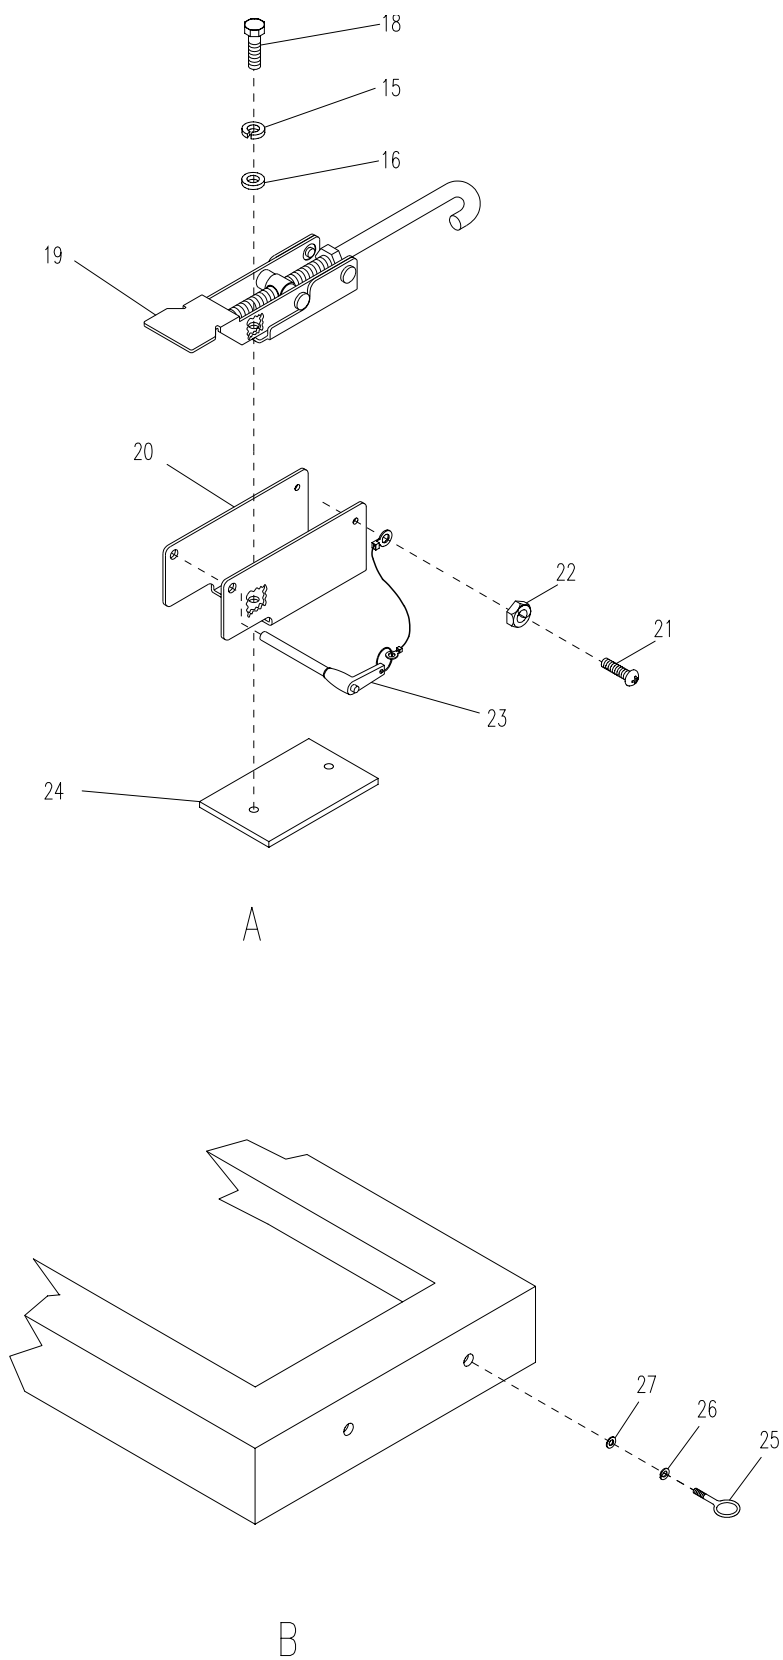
Frame Assembly, JTACS/WIN-T (Sheet 1 of 2)
